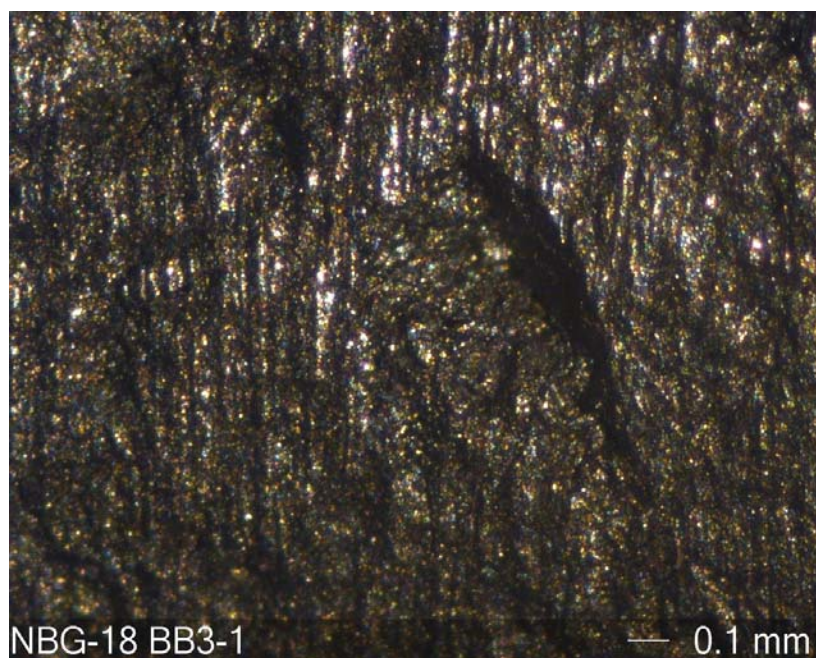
NBG-18 specimen BB3-1 macrograph showing surface roughness and machining marks
